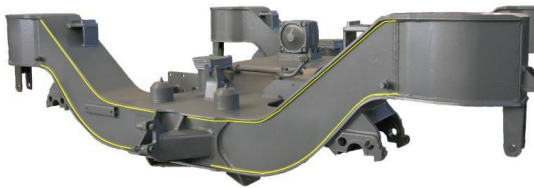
Bogie: the welding path is highlighted in yellow.
